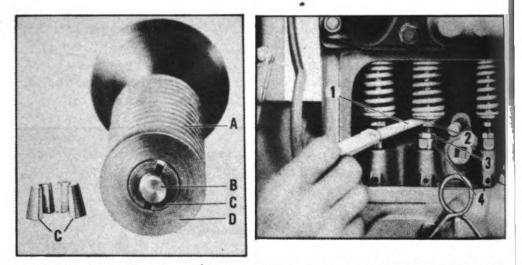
VALVE ASSEMBLY AND CHECKING TAPPET CLEARANCE
